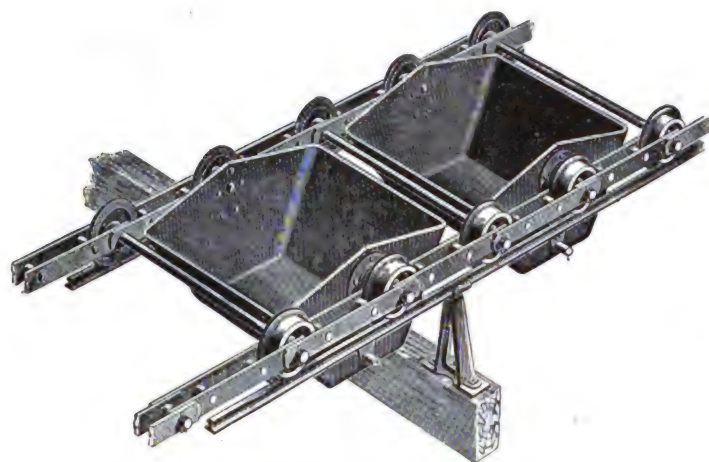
HUNT CONVEYOR, CHAIN AND BUCKETS.
